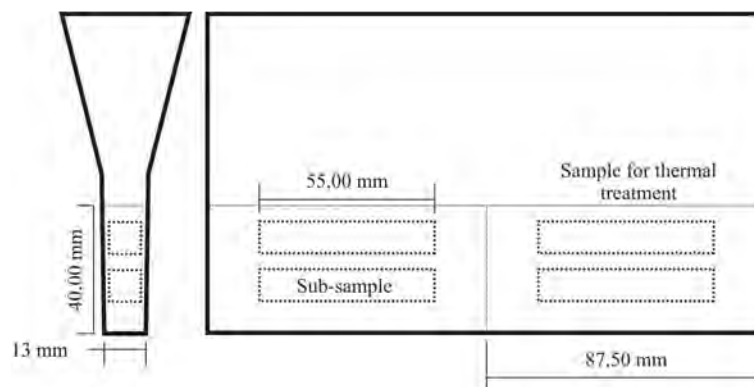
Schematic representation of the Y-block produced in H12Ti and H16Ti. The position of the samples and specimens used in this work are represented. The bottom part of the block was used, and the top part was discarded.
